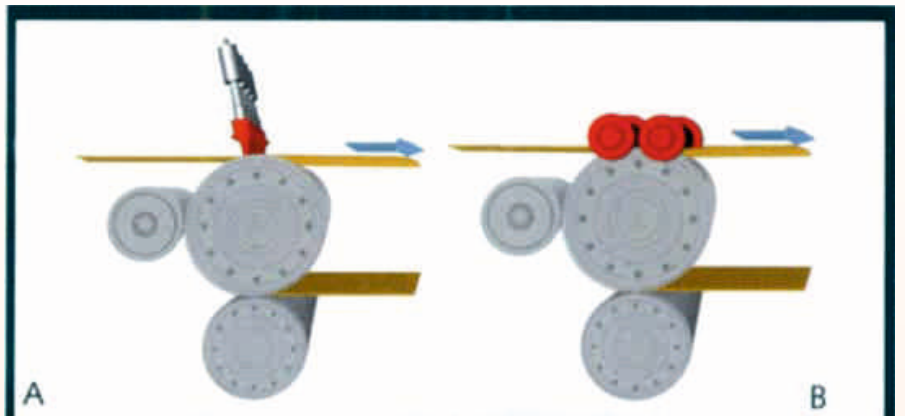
Concepts for ultrasound welding to bond fluting medium and liner in the Single Facer
